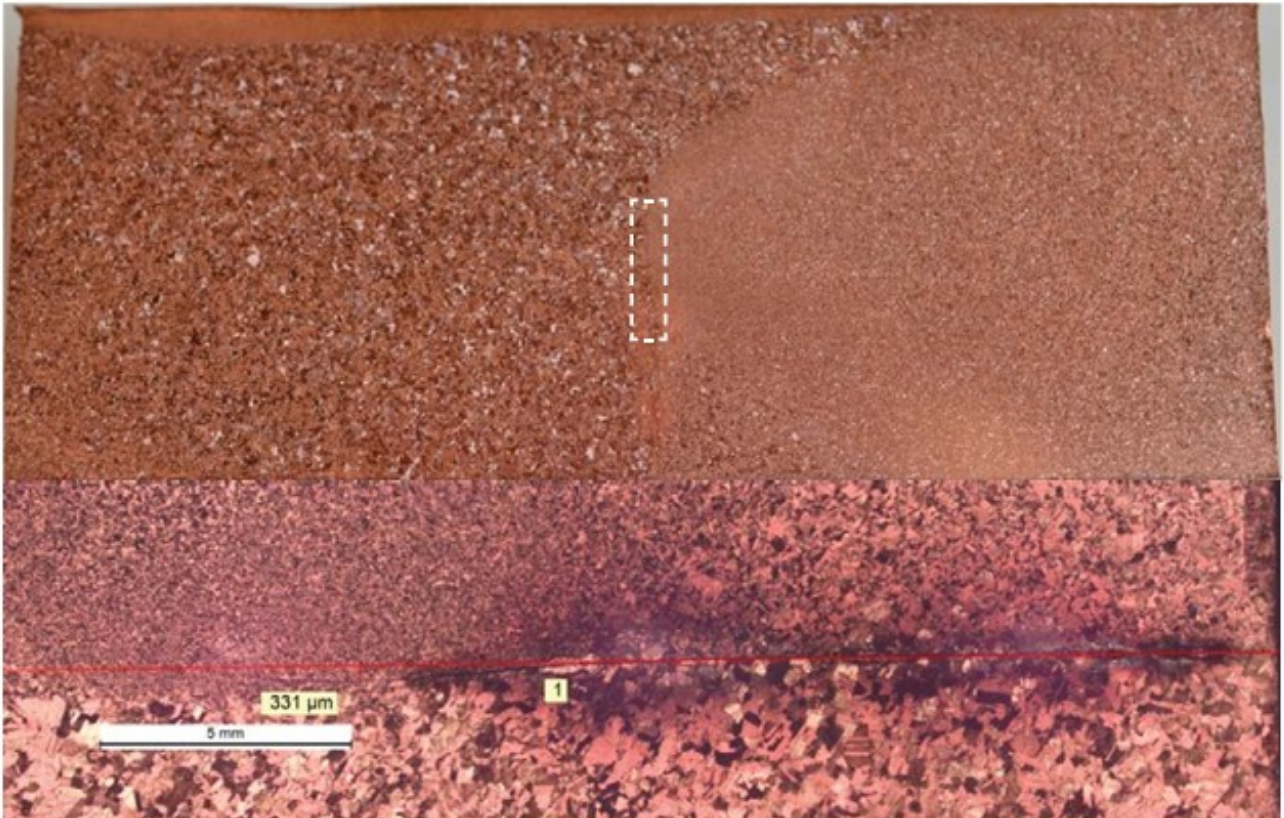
Macro sample from weld 612. The top picture shows the weld zone on the right hand side, while the bottom picture shows a zoom of the white dashed box (rotated 90° counter clockwise). A maximum depression of the vertical joint line of 0.331 mm was measured.
